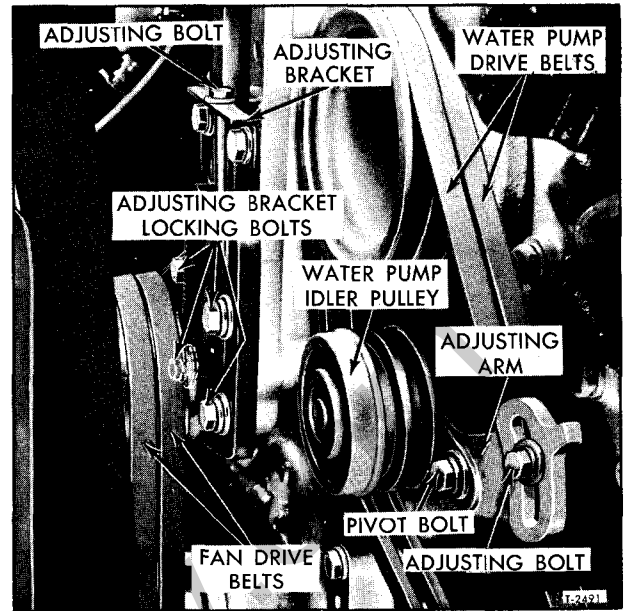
Belt Adjusting Mechanism (6V-53 Engine)
